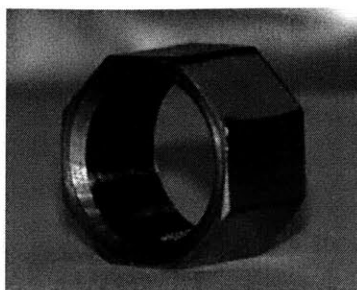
The back iron for the linear motor magnets. Eight NdFeB magnets are glued to the flats, and the center portion fits onto a shoulder of the shaft, which is made of a magnetic stainless steel.
